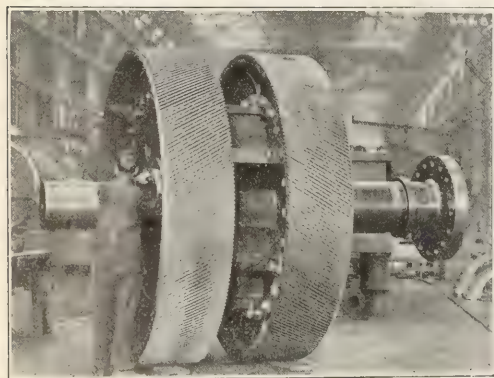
LARGE REDUCTION GEAR OF 3750-KW TURBO-GENERATOR SET
